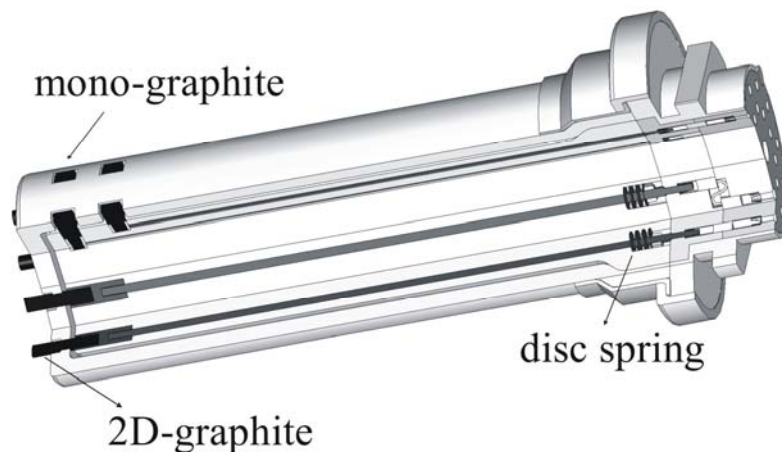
The Gundestrup-like probe head consisting of two arrays separated radially, both with eight poloidally distributed flat collectors and a four-Langmuir-probe array mounted on the flat end of the head.
